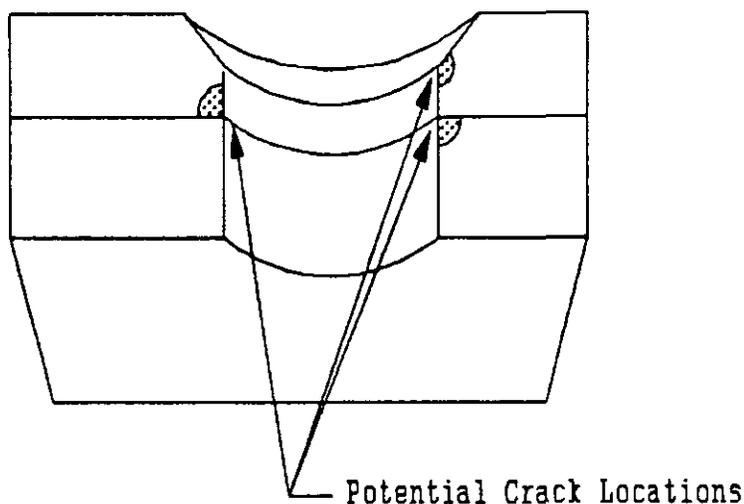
Typical fastener crack locations.
